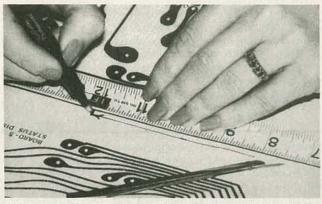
MARKING OFF a segment of the center line. That segment gives you a useful reference when you make your full-sized mask from your double-sized layout.
